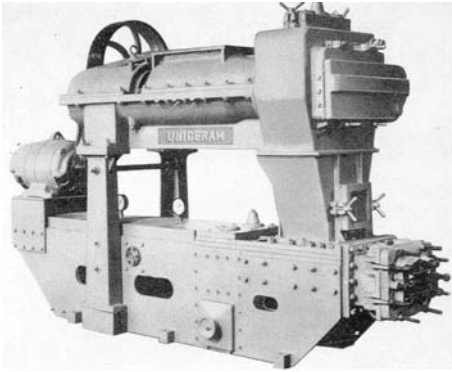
Combined de-airing extrusion unit with de-airing double-shaft mixer and piston extruder, built by Messrs. Uniceram, Marseille, about 1960
